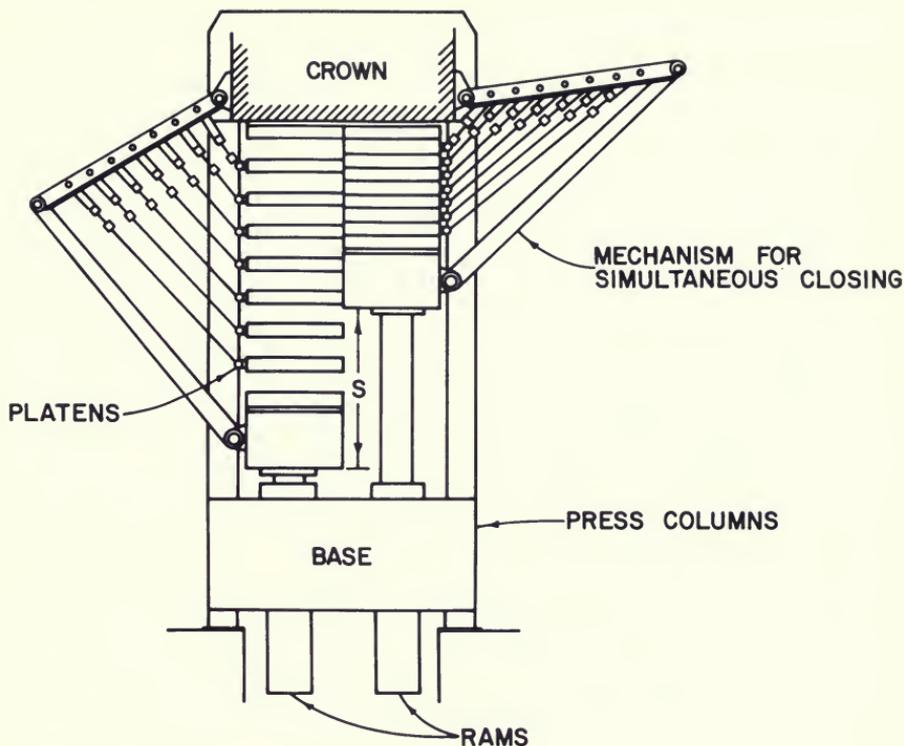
Eight-opening press with simultaneous closing arrangement. (Drawing after van Hullen 1966.)
